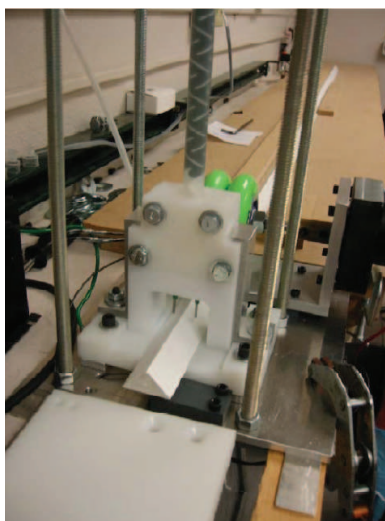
Automated glue machine used to apply epoxy to the triangular bars before they were placed into the plank gluing jig.
